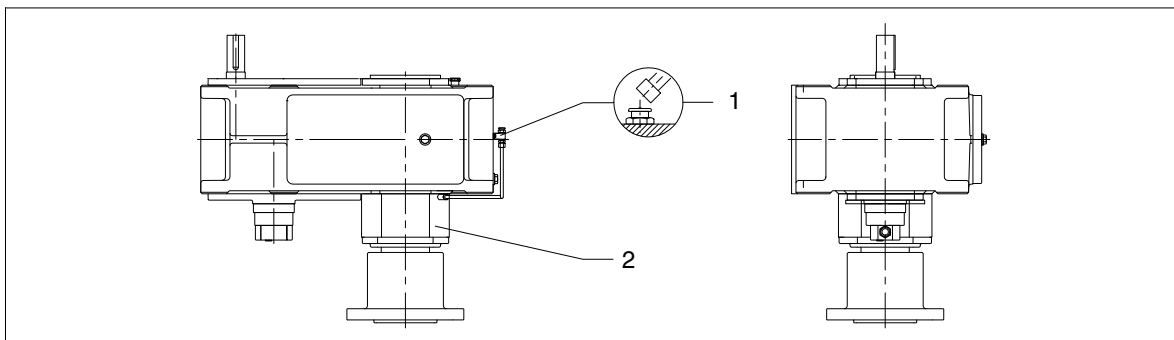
Lubricating point for lower output-shaft bearing of type H.BV with oil-dam pipe (see item 5.7.5)
